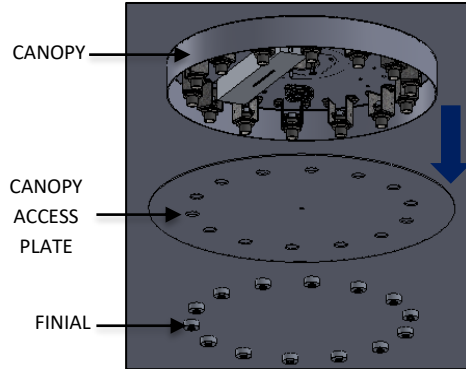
CANOPY ACCESS PLATE DIS-ASSEMBLY
